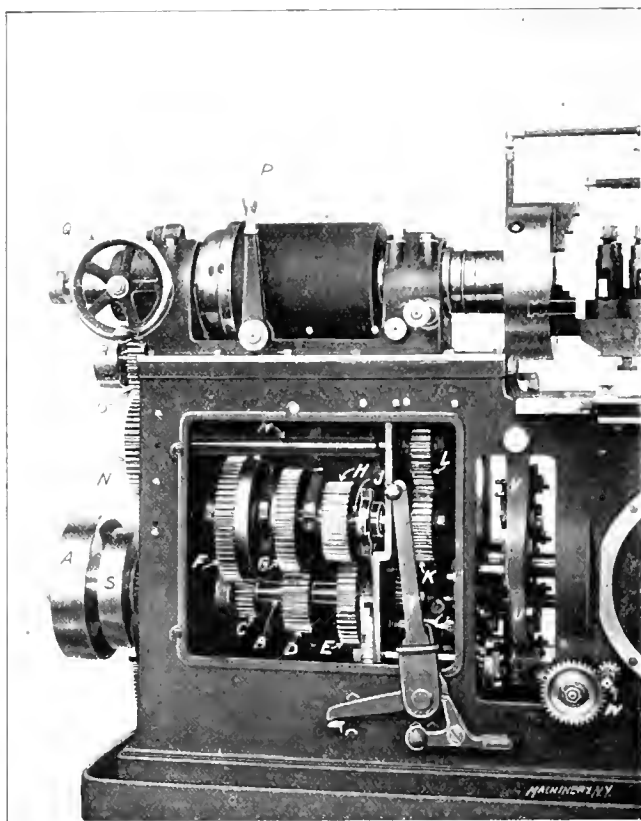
Door in Base removed to show Spindle Driving Mechanism.
